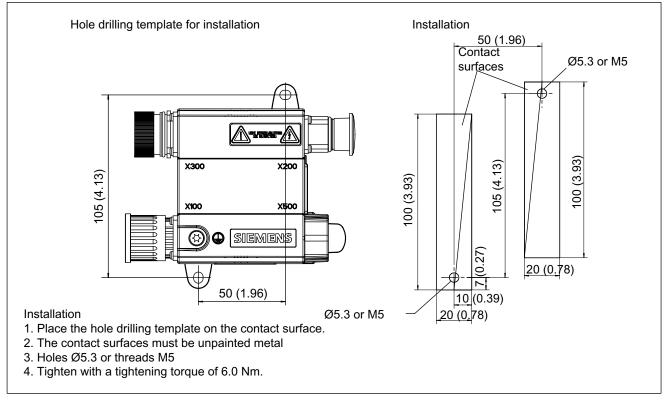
Dimension drawing SME120, Order number 6SL3055-0AA00-5JA0
